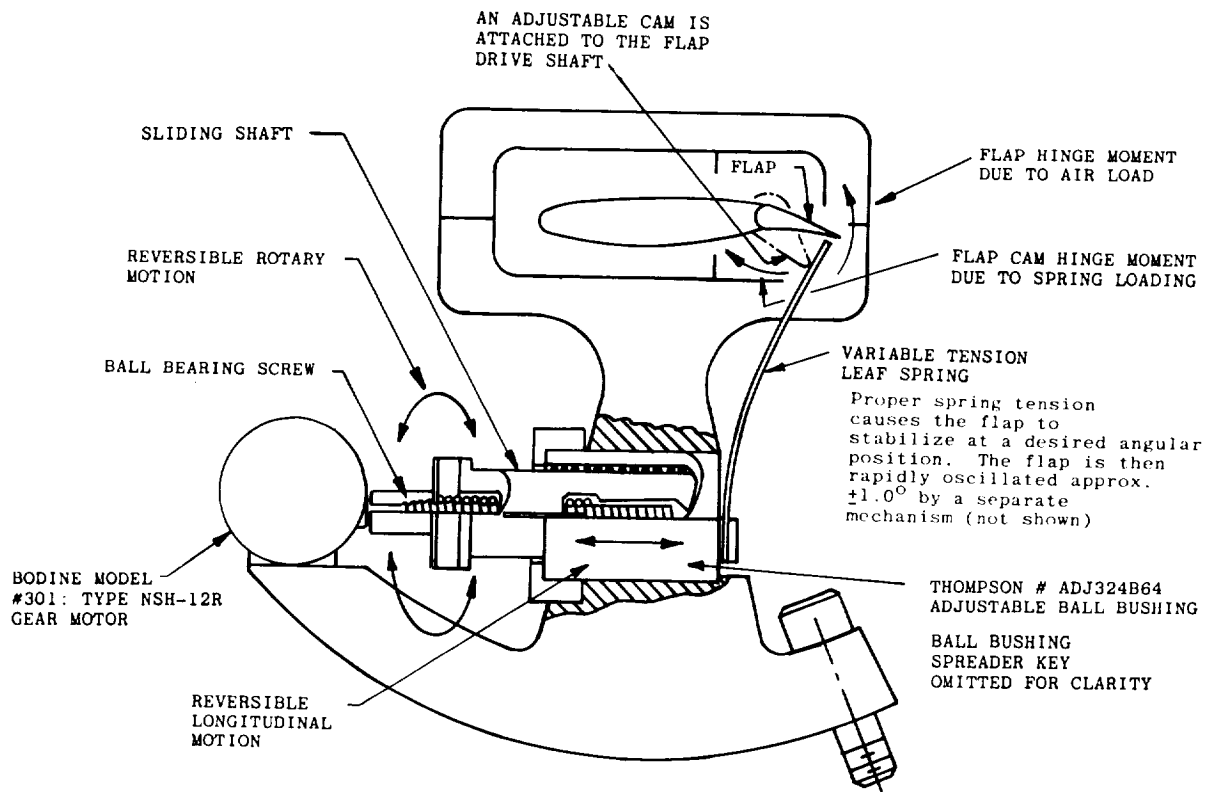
CONTROL SURFACE LOADING MECHANISM (ROTARY TO LINEAR MOTION)
